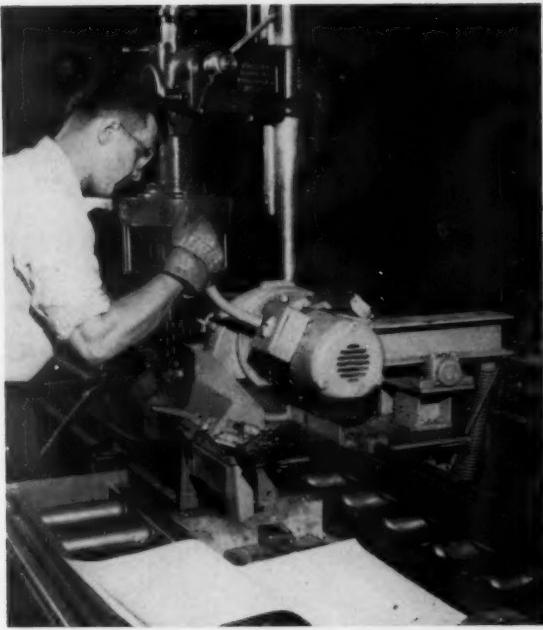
CIRCULAR SAW with 75-tooth, 12-in. diameter blade cuts bus to desired length in a few seconds after bar is rolled down conveyor to pre-set stop block. Bar is then brought back a few inches to drill press where four holes are drilled.
